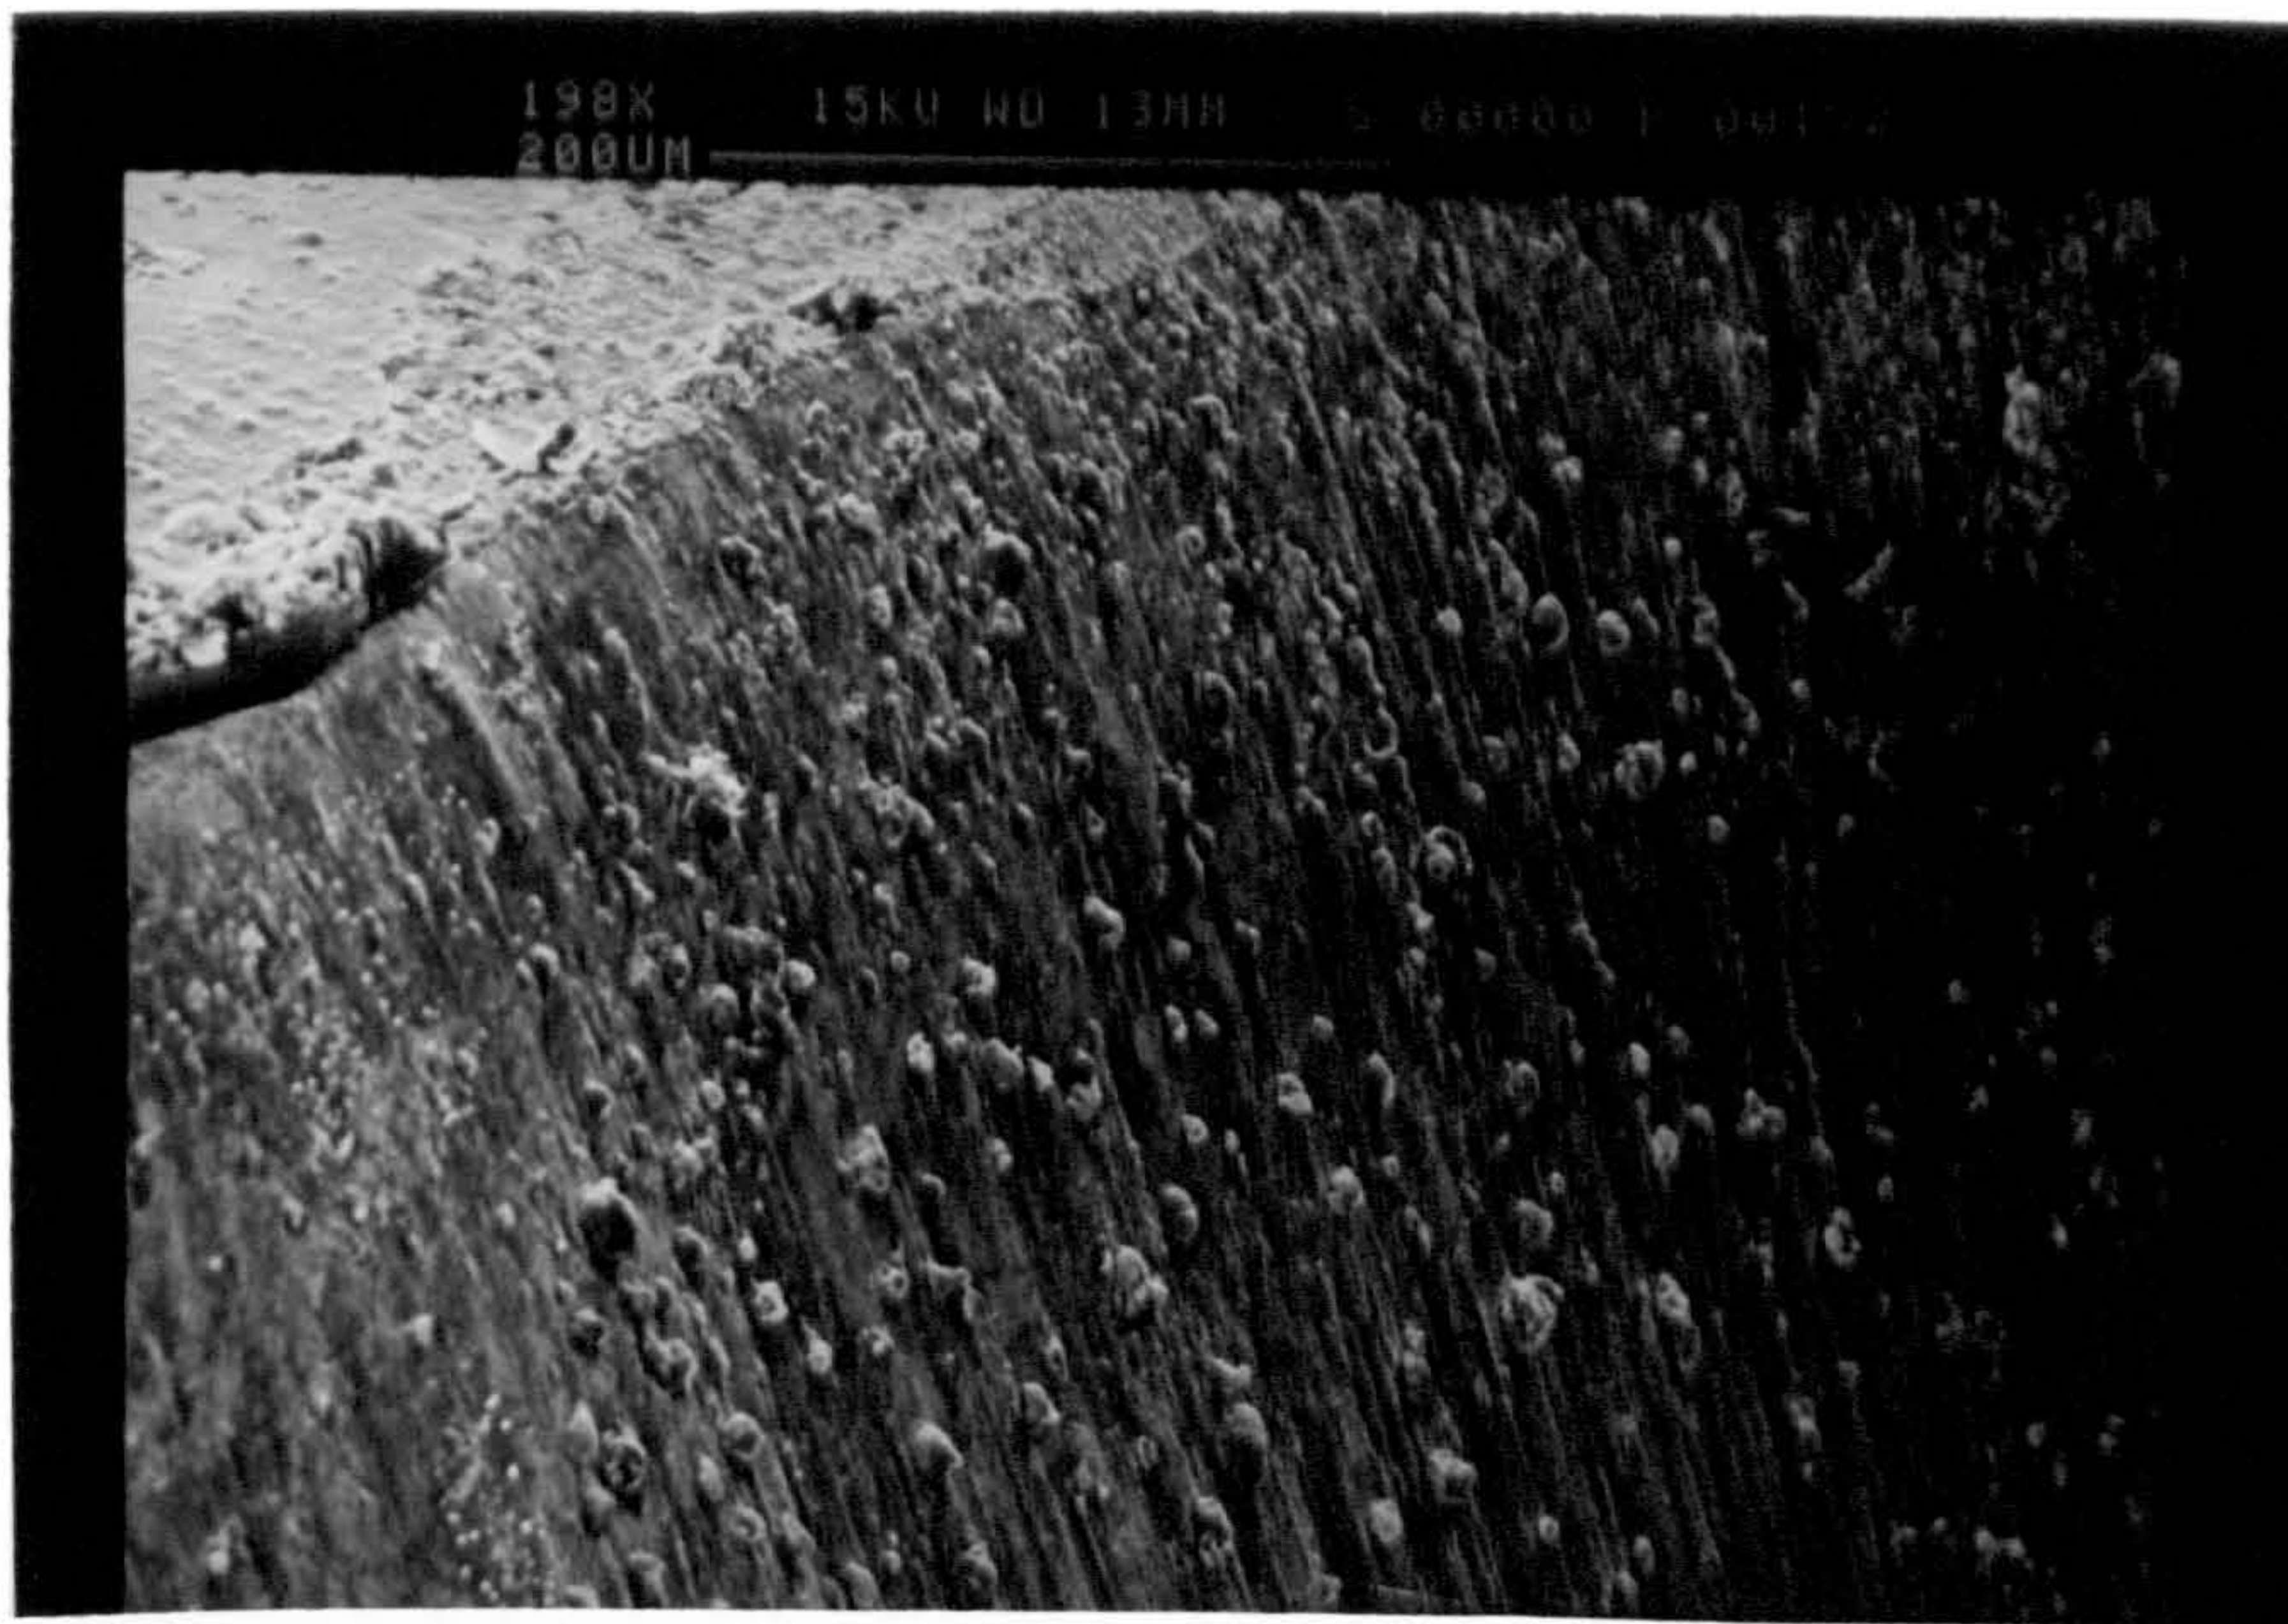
Flank wear land of a HSS tool after cutting at a high speed (200 m/min) showing severe abrasion wear. (Feed = 0.20 mm/rev, cutting time = 1 min)
